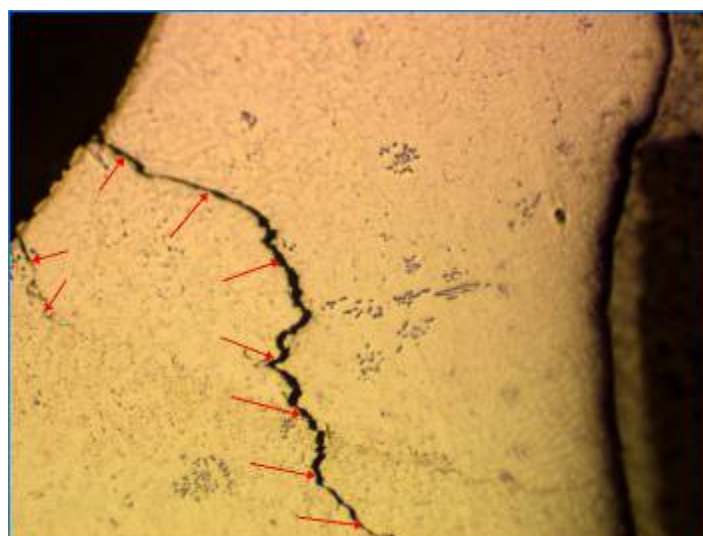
cross section, SN63, U52, left pad solder crack, 200xb
